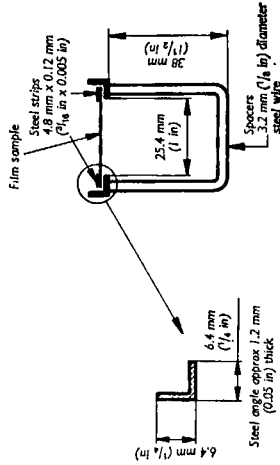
Section through supports showing wire spacer for 35 mm film apparatus.
